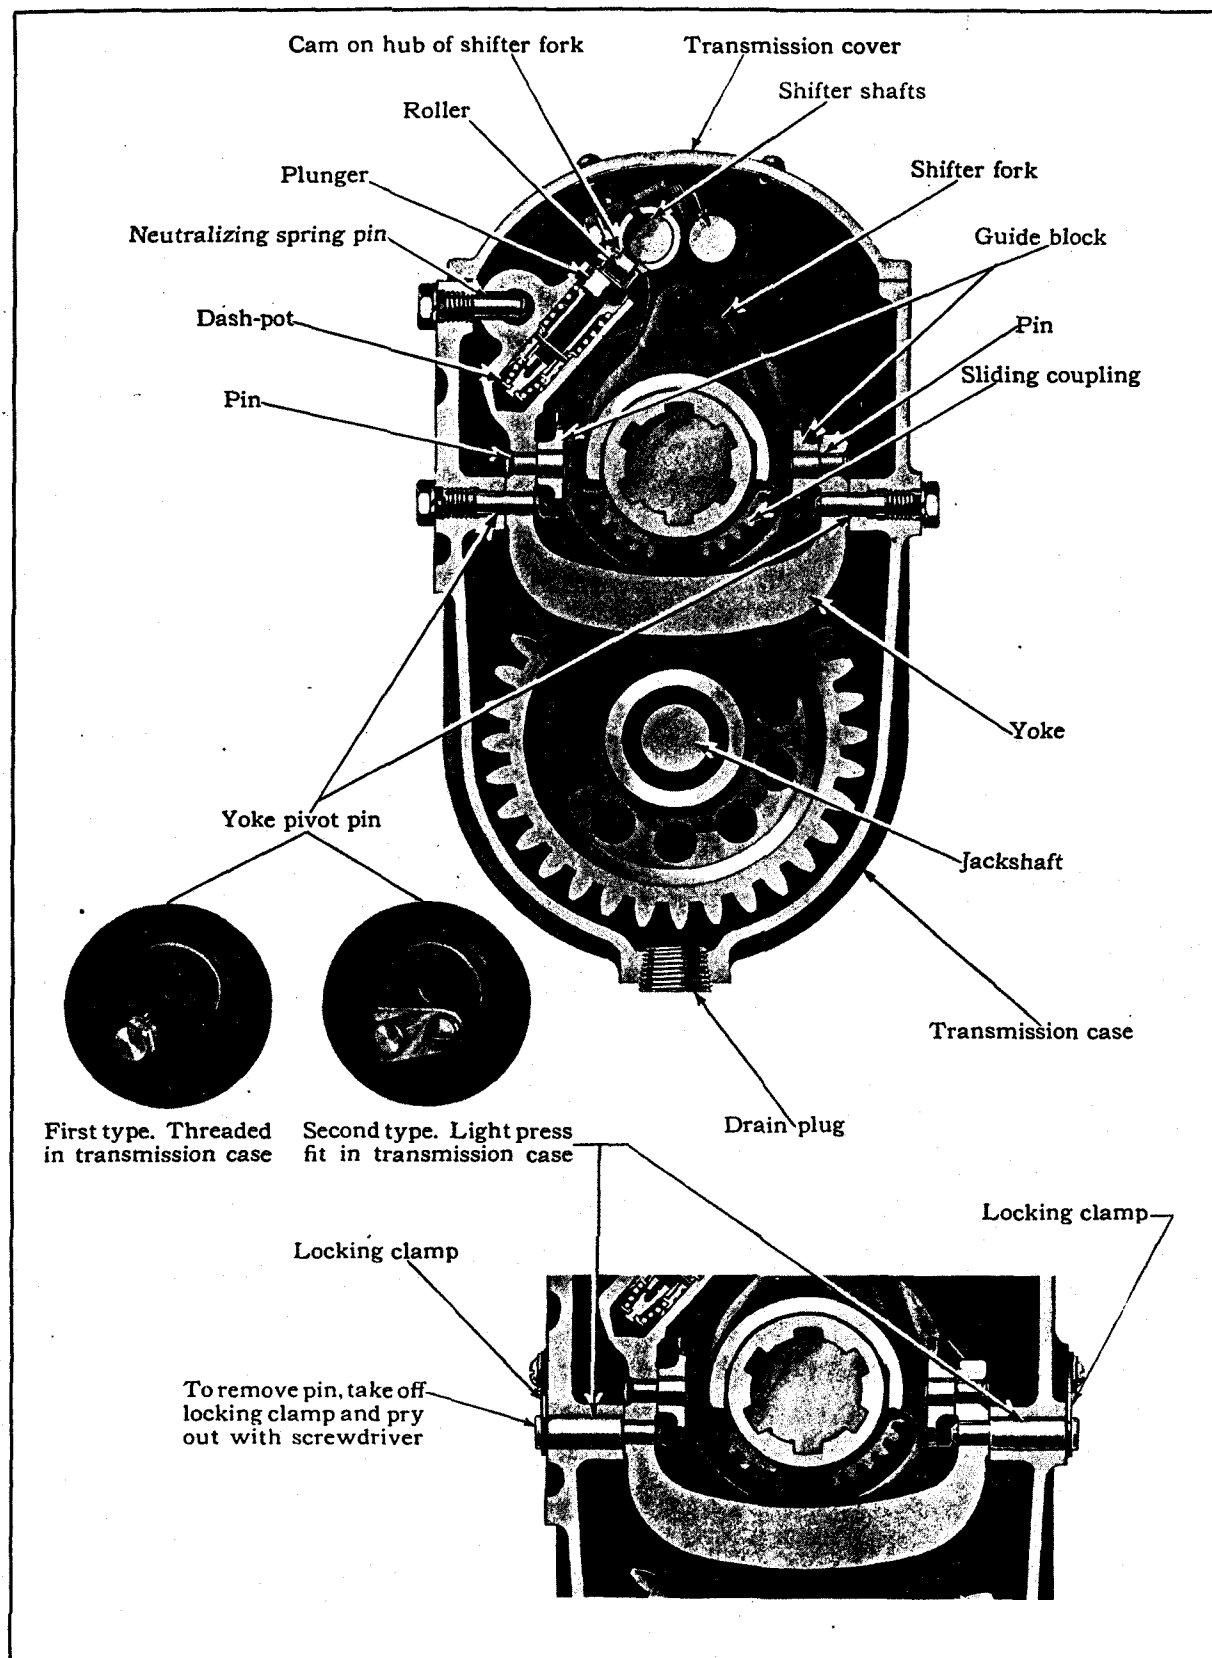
Cross-sectional view of transmission, Cadillac 341-B and
